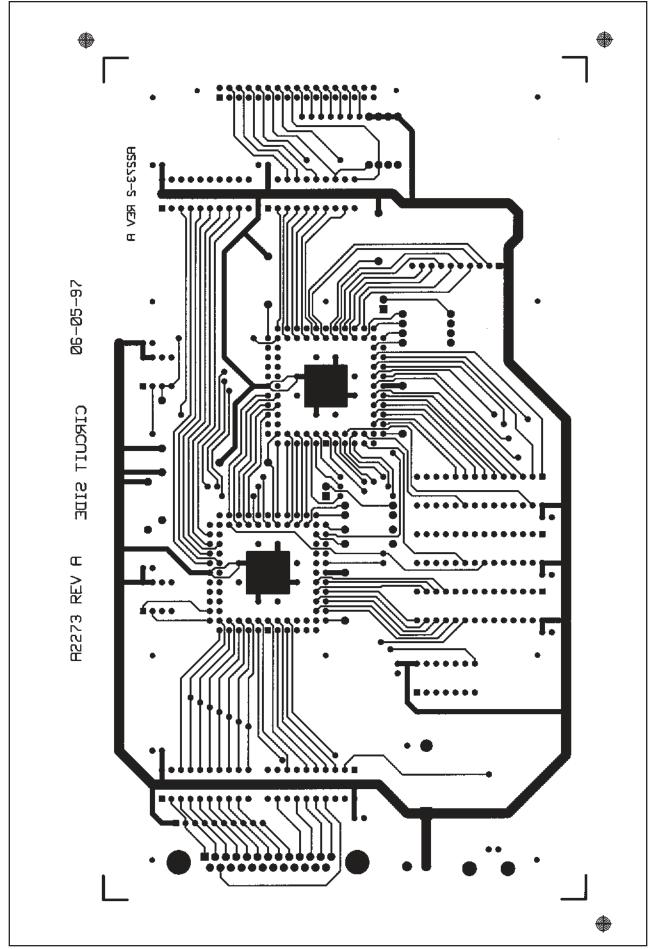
Bottom Layer of DEM-DDC112U-C PC Interface Board.
